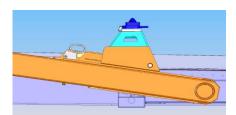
Sec. 3(11) i Stacking block in locked (stacking) position showing the sliding "safety pin" engaged, the "Oring handle", the "safety latch" engaged.
